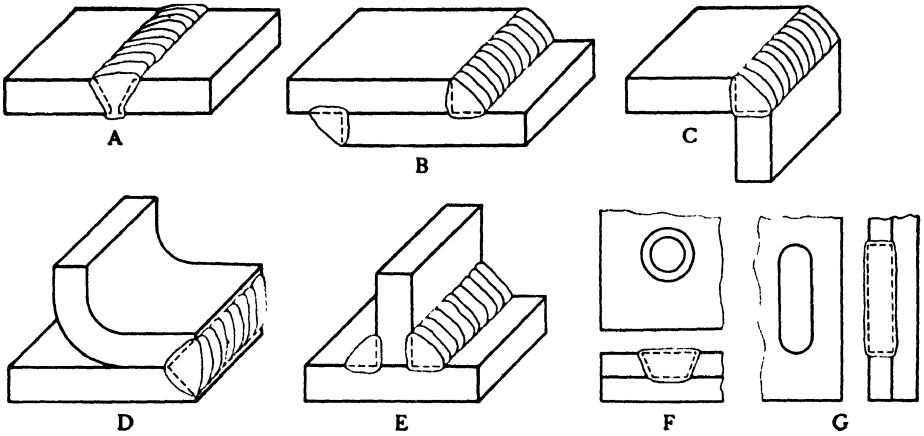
Basic types of joints. (A) Butt joint (V-groove weld). (B) Lap joint (fillet weld). (C) Corner joint (fillet weld). (D) Edge joint (V-groove weld). (E) Tee joint (fillet welds). (F) Plug weld. (G) Slot weld. Prob. 420.
